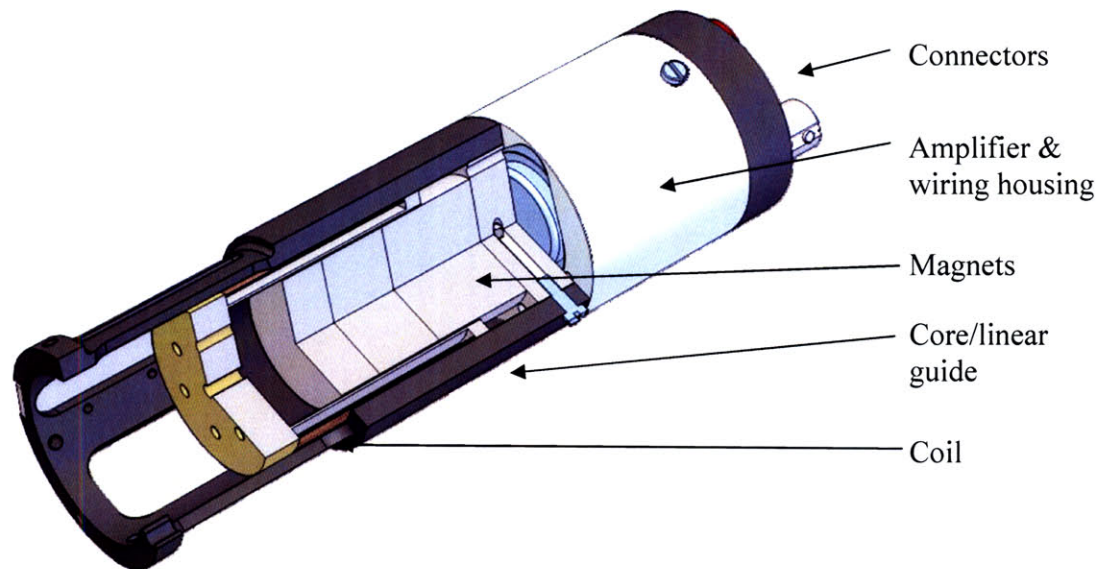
The amplifier and wiring housing can be seen at back, with the power amplifier nested into the aluminum on the front face. The cutaway view of the motor also shows stacked magnets in the core, bottom plate insert, field guide at the top of the core, and of course the coil itself and the forward-extended core that then serves as the linear bearing.
